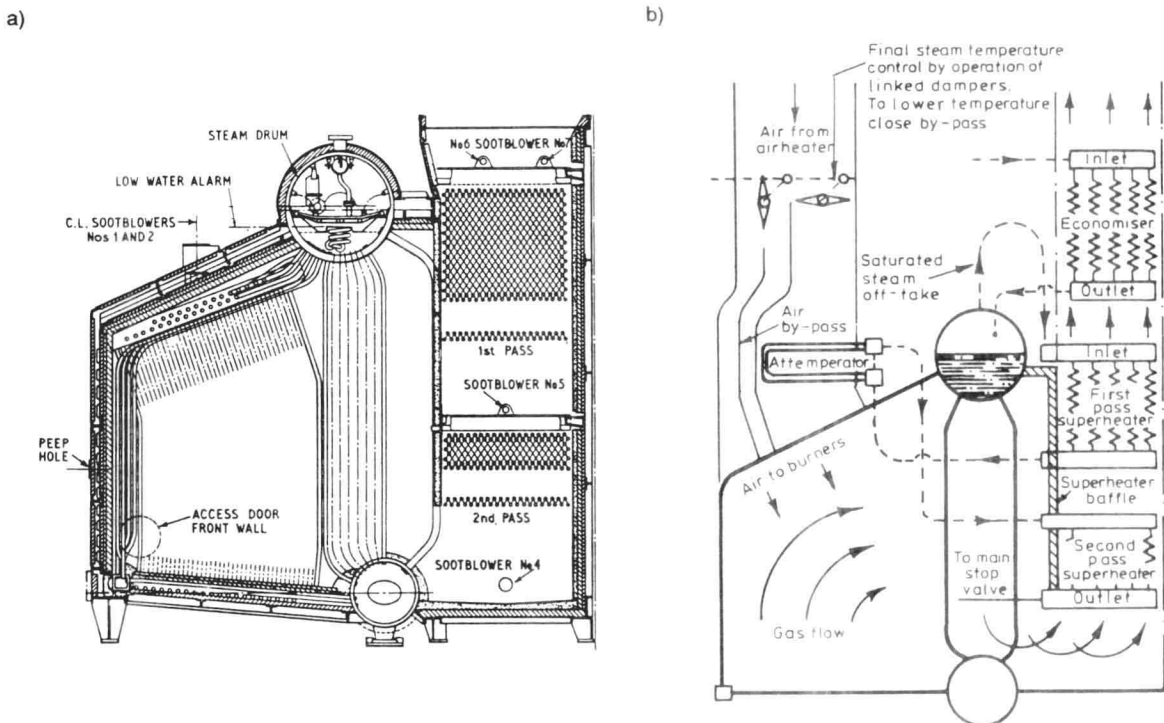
Foster Wheeler ESD I type boiler: a) sectional view; b) superheater and attemperator arrangement.
